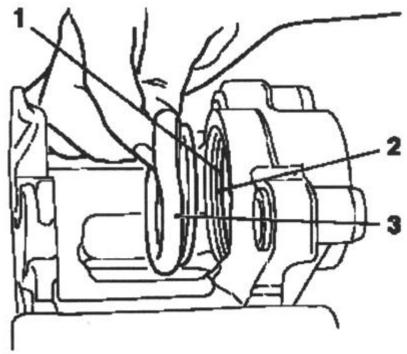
Installation new seal-tion ring: 1 - O-ring, 2 - edge, 3 - groove
